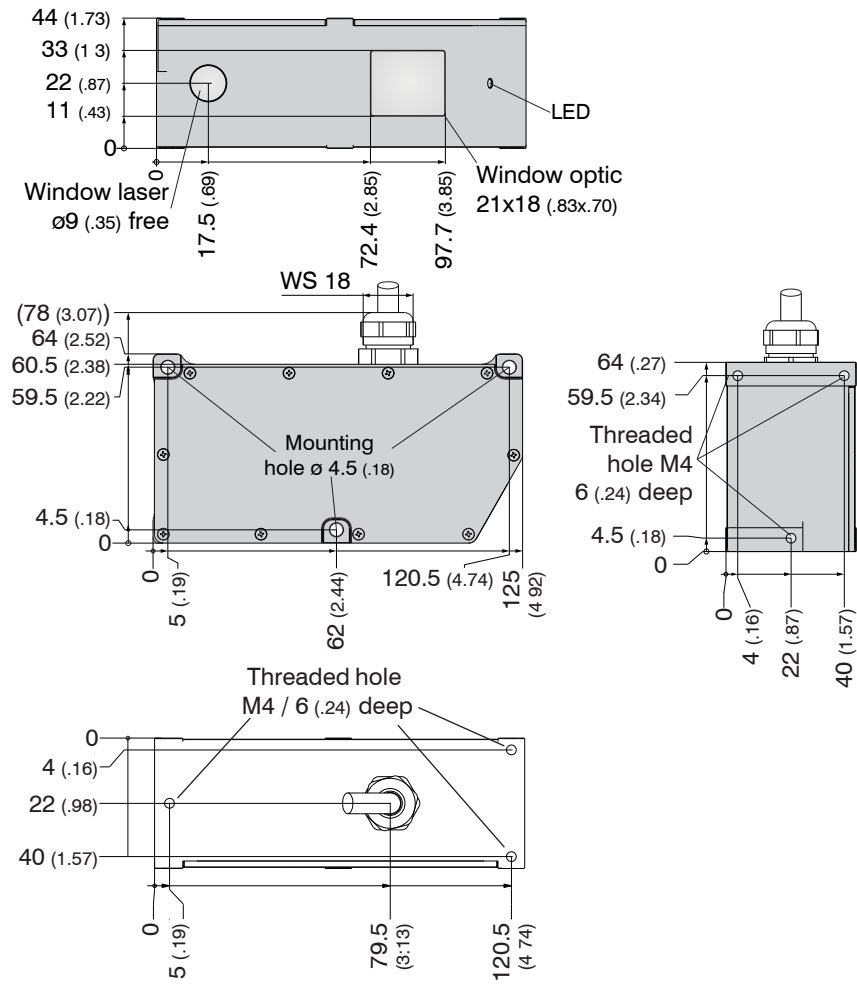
Dimensional drawing LLT 28x0-100, dimensions in mm (inches), not to scale
